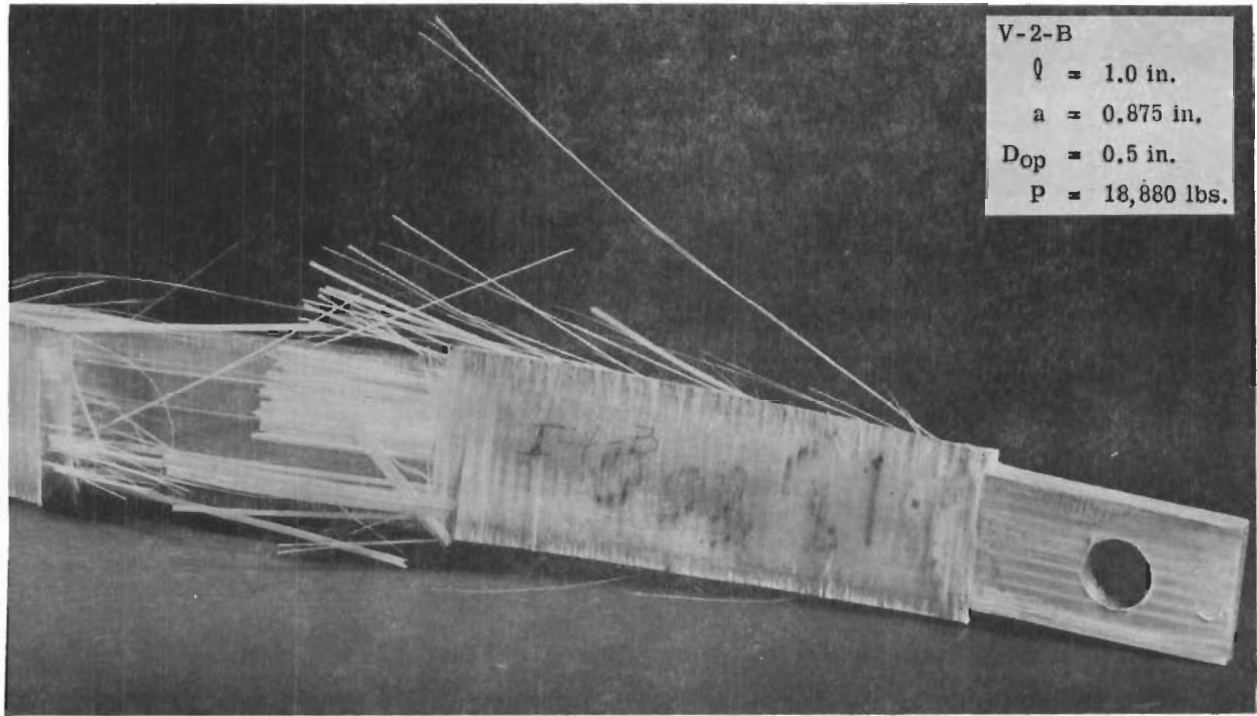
Flat Plate Specimens-Failure of AF-111 Adhesive Joint
